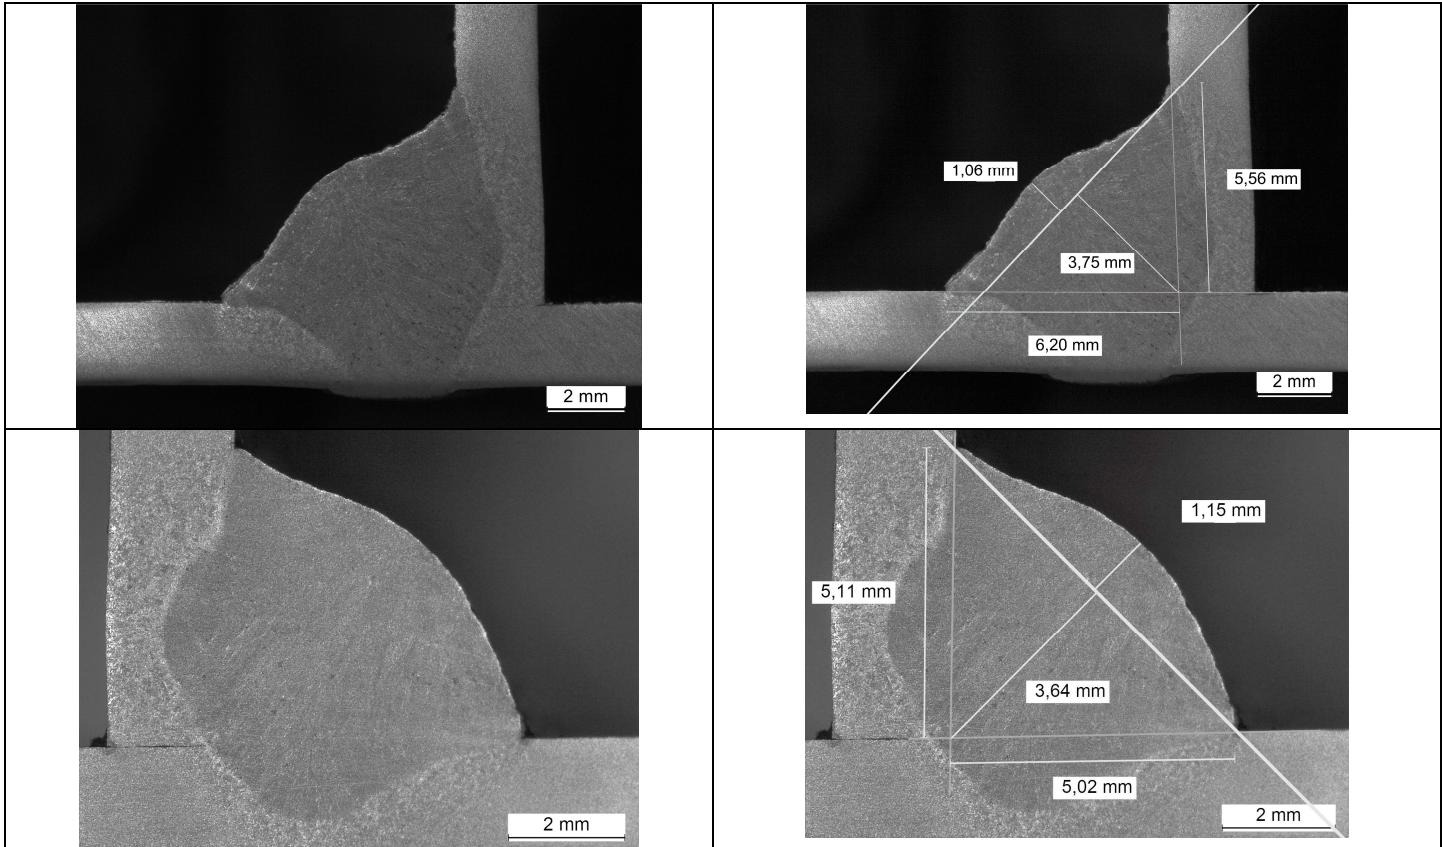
Macrographic examination of the 2mm fillet weld sample
